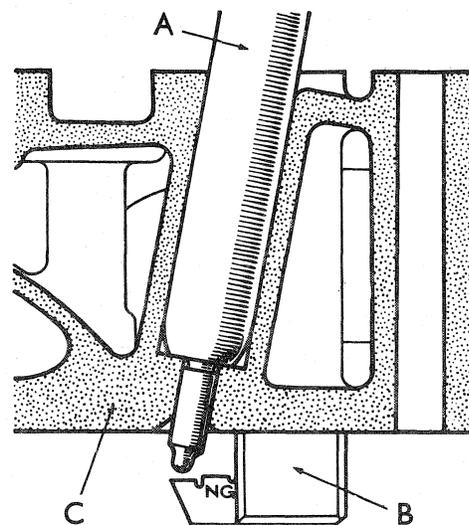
CHECKING CYLINDER HEAD BEFORE REFACING
